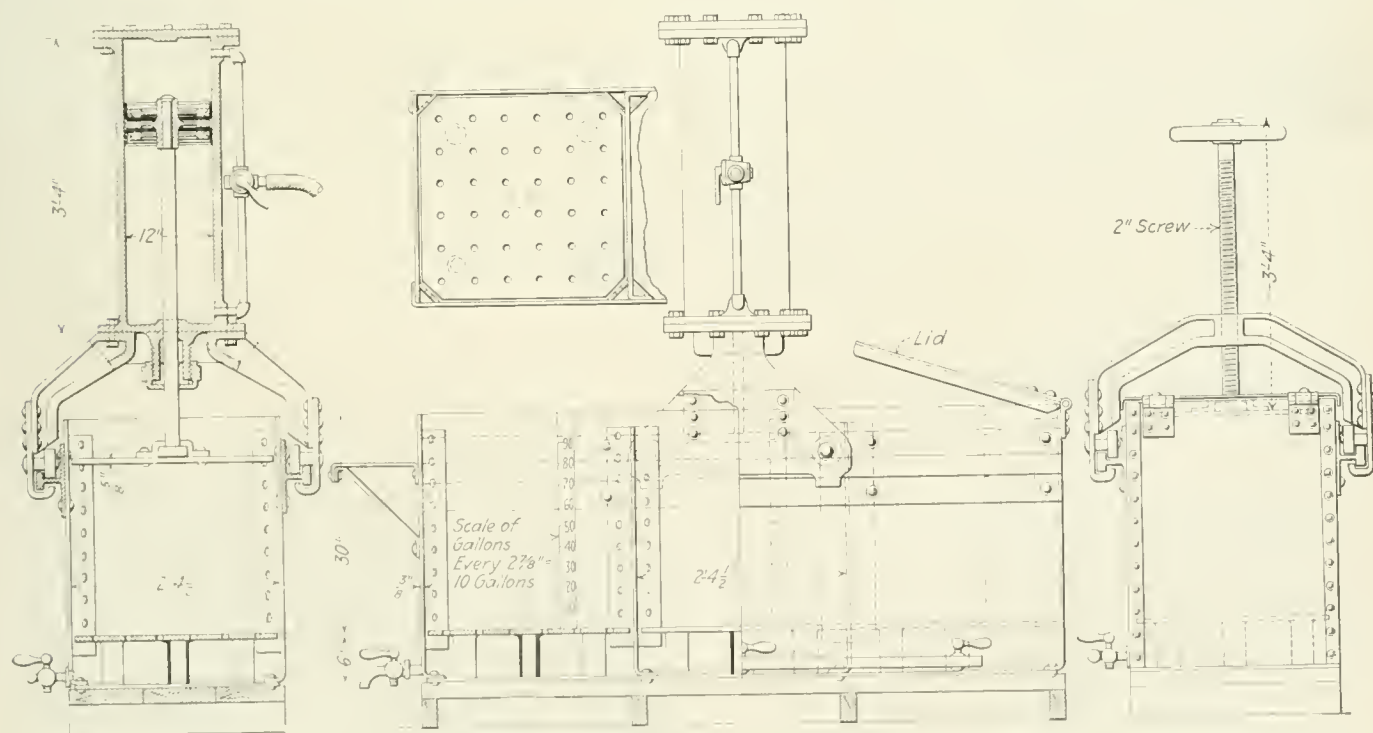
Tanks Equipped with Press for Preparing Journal Box Packing
